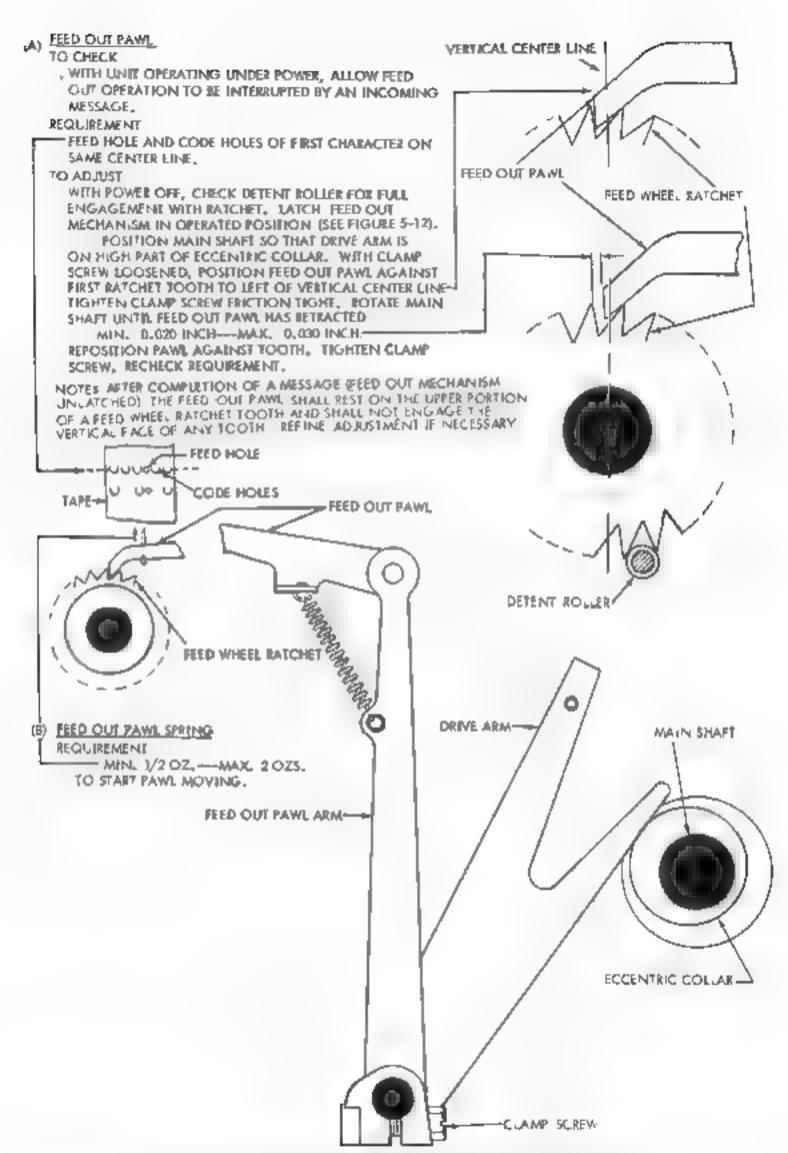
NON-INTERFERING BLANK TAPE SEED OUT MECHANISM. EARLIER DESIGN
